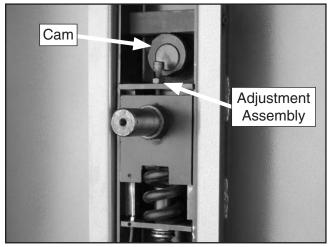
Example of tension adjustment assembly locations (top wheel removed for clarity).
